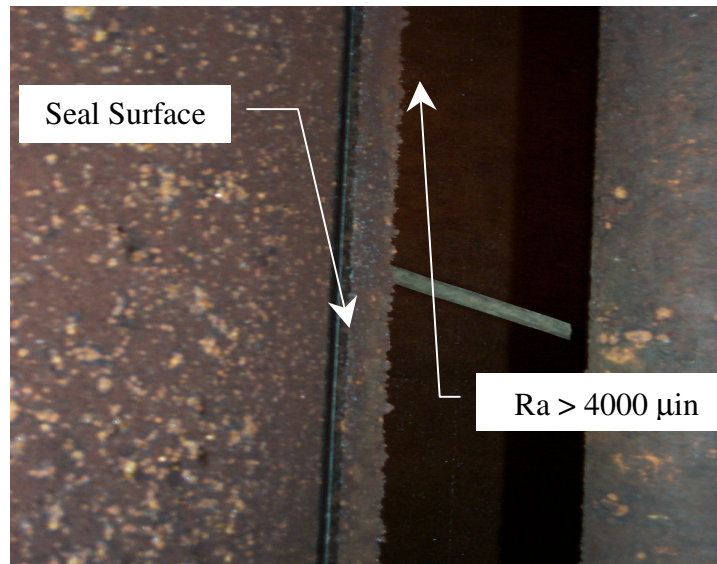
The Dalles Unit 4 wicket gate leading edge Ra > 4000 μinches
